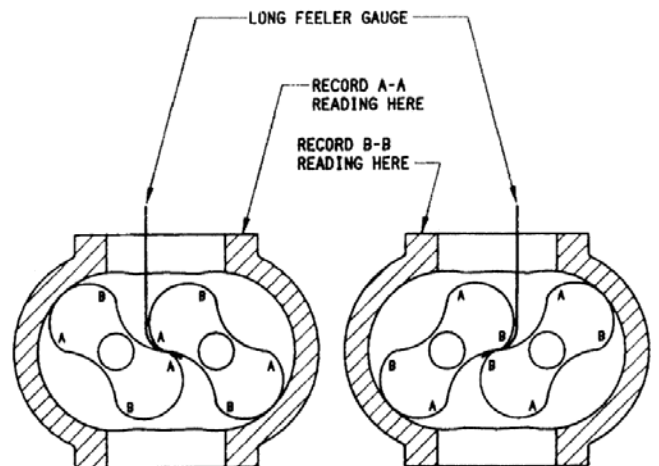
A Checking Interlobe Clearance on 2-lobe Models
